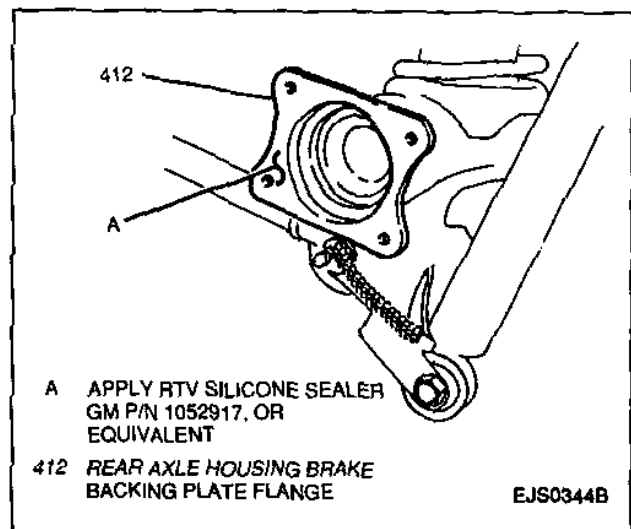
Rear Axle Housing Brake Backing Plate Flange
